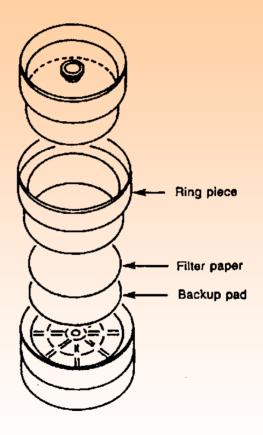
1-11. Exploded view of three-piece cassette shows placement of backup pad.
